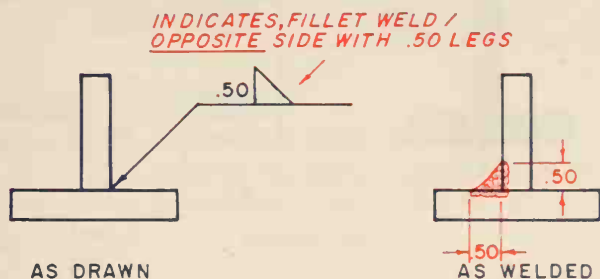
Dimension to the left of welding symbol indicates length of leg or side of weld
